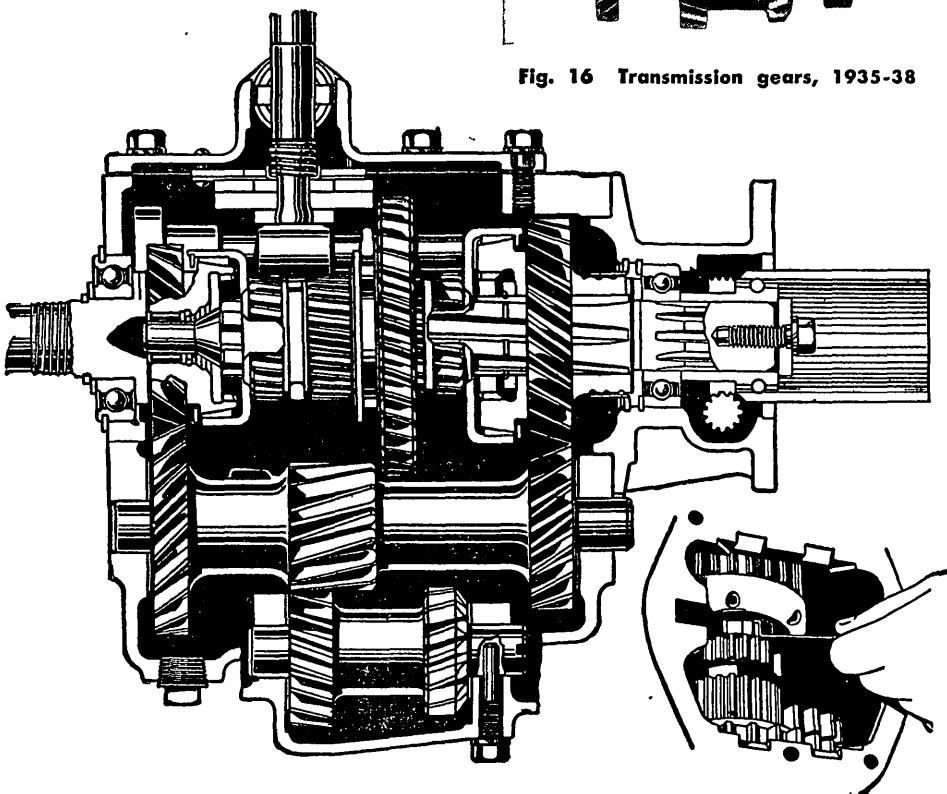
Transmission, 1935-38. Inset shows method of checking clearance between synchronizer spring and spline shaft shulder
